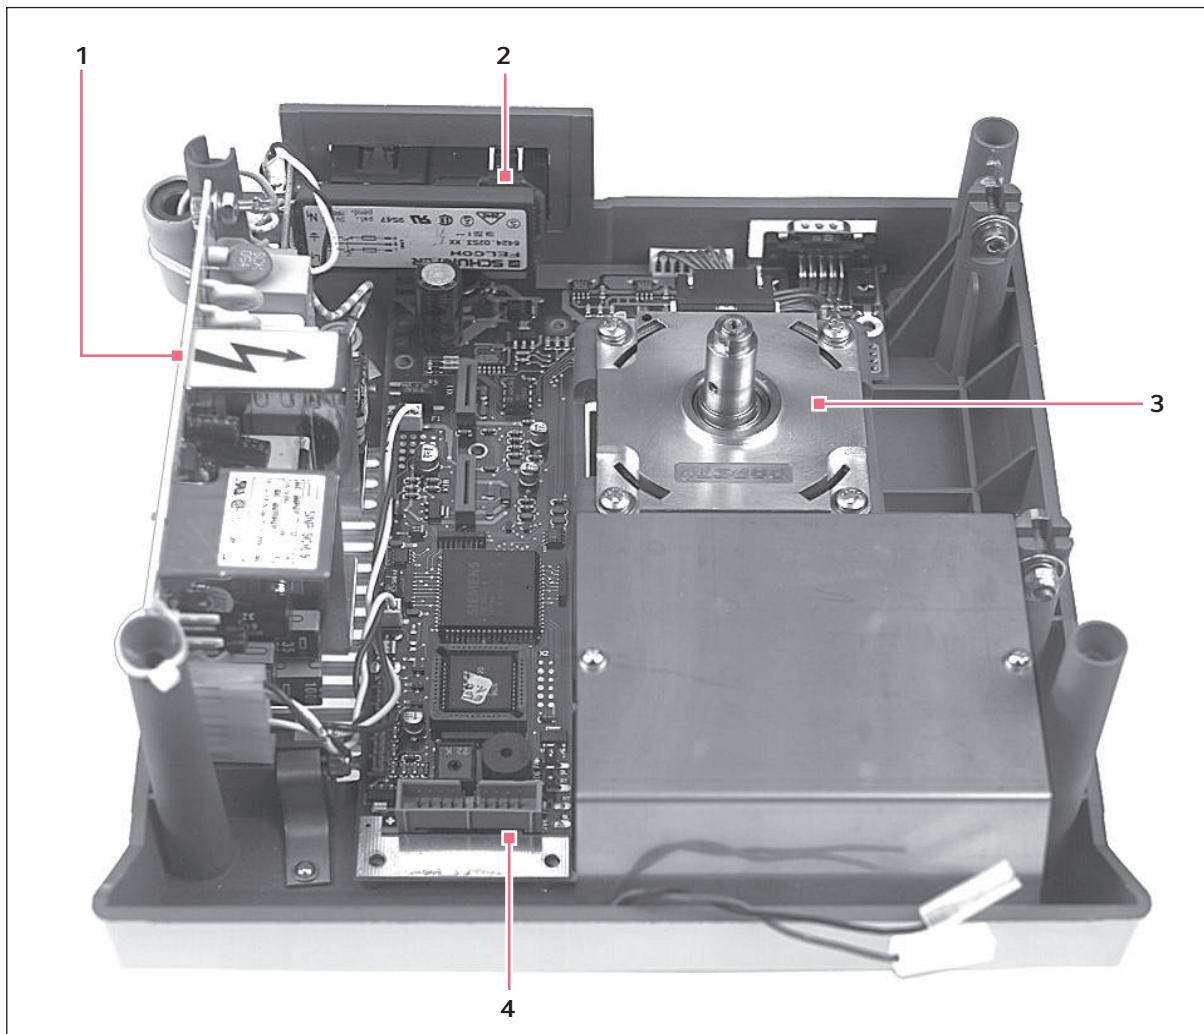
PCB, motor, mains input module and switched-mode power supply
